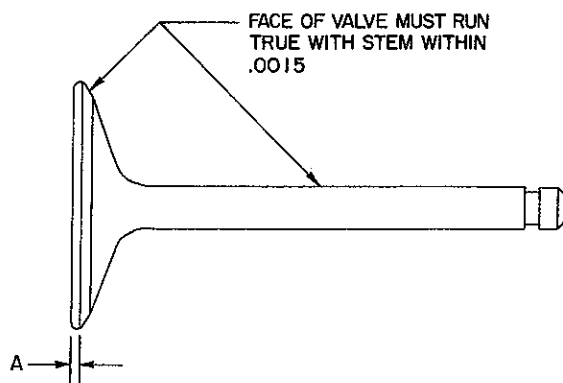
Valve Showing Locations for Checking Run-Out and Section for Measuring Edge Thickness
